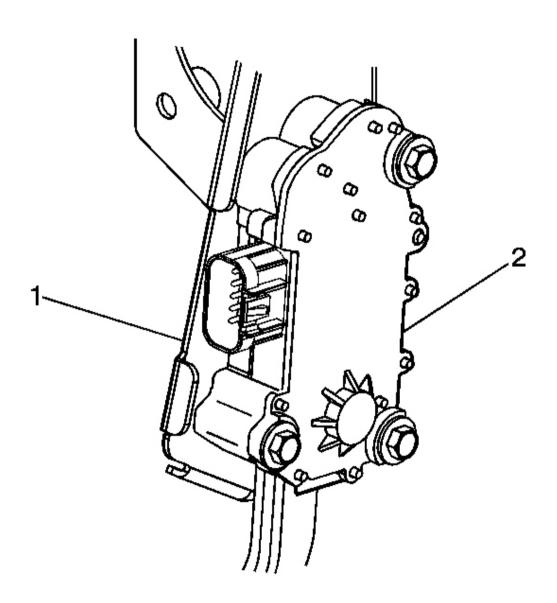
View Of Accelerator Pedal Position (APP) Sensor Courtesy of GENERAL MOTORS CORP.
